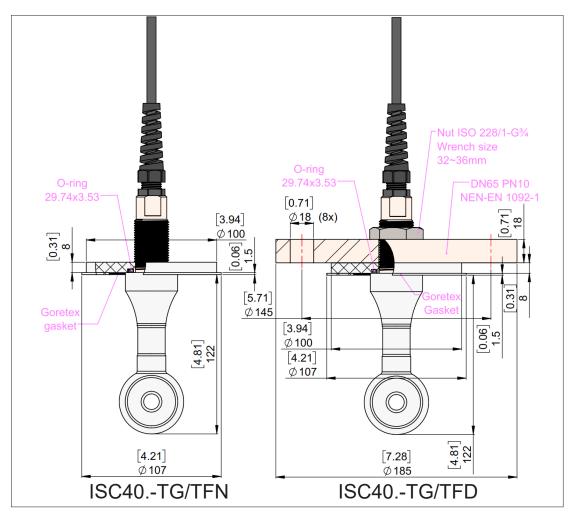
Flange adapters (opt. /TFD, /TFN) for -TG sensor in combination with T-piece
